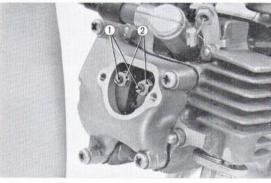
1 Tappet adjusting screw (2) Cock nut
